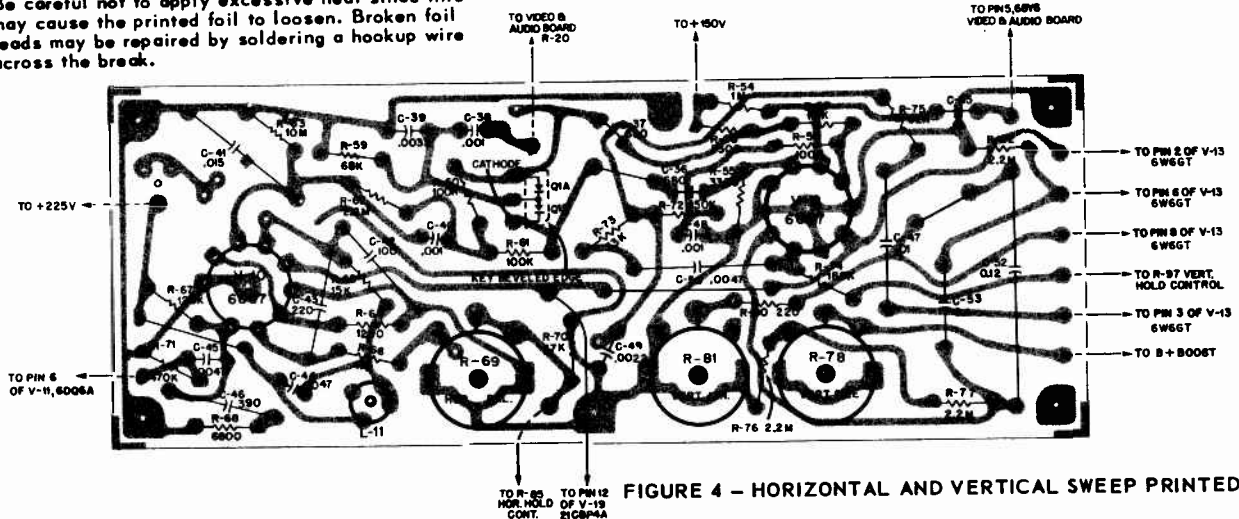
HORIZONTAL AND VERTICAL SWEEP PRINTED BOARD
